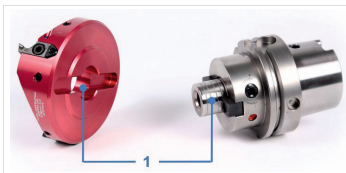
Cleaning the tool and hydraulic clamping arbor
